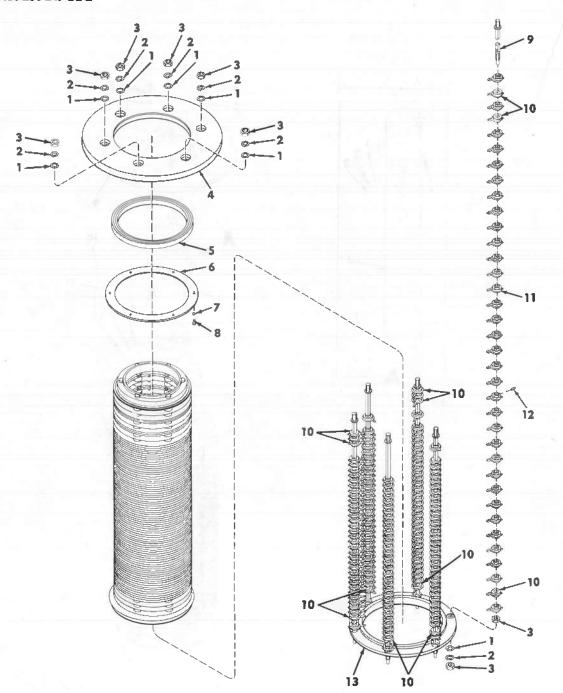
RING ASSEMBLY, ELECTRICAL CONTACT /8171910/-PARTIAL EXPLODED VIEW
